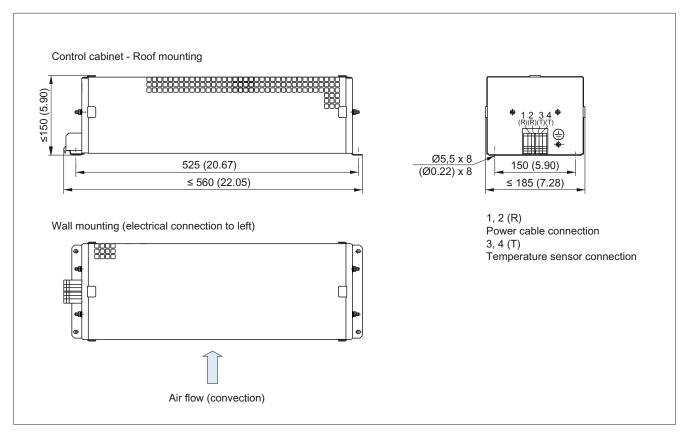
Dimension and installation drawing (roof and wall mounting) of braking resistor 6SE7018-0ES87-2DC0 where $P_n/P_{max} = 1.25 \text{ kW}/7.5 \text{ kW}$, all dimensions in mm and (inches)
